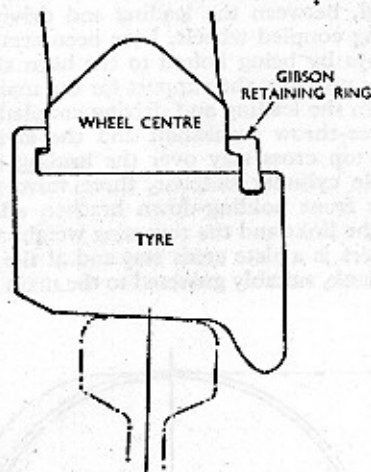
Wheel Rim and Tyre with Gibson Ring Fastening
